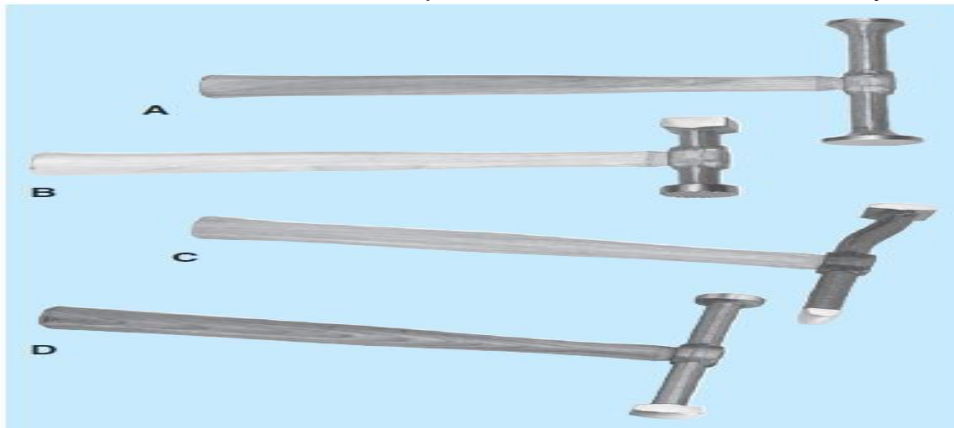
Here are several finishing hammers: (A) double round, (B) shrinking hammer, (C) offset bumping, and (D) dinging hammer. (Courtesy of S&H Industries)
